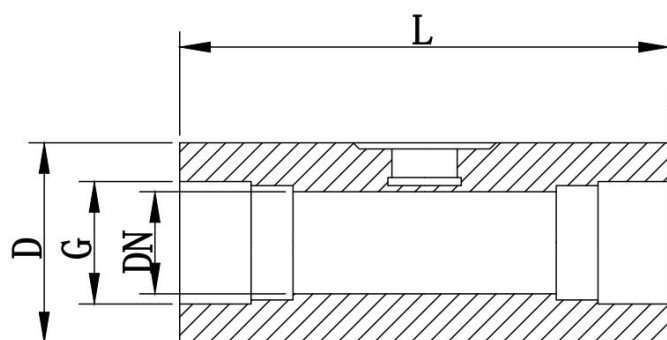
Dimensional drawing of DN4~DN50 female thread connection type turbine flow sensor
